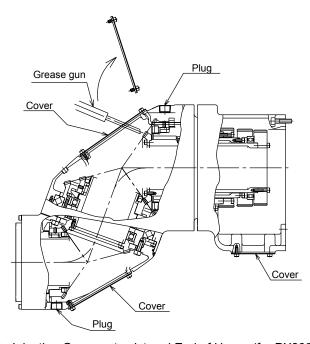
Injecting Grease at wrist and End of U-arm (for PX2850-B10)
